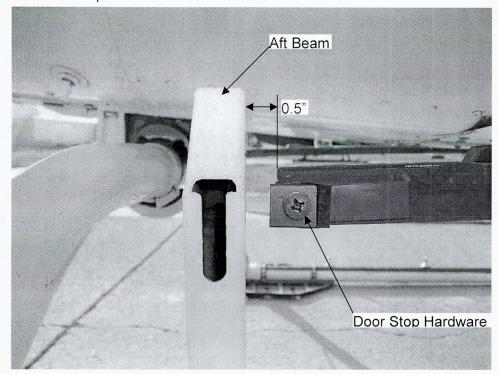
Completed Modification (Low Mounted Quick Release Beam shown)
